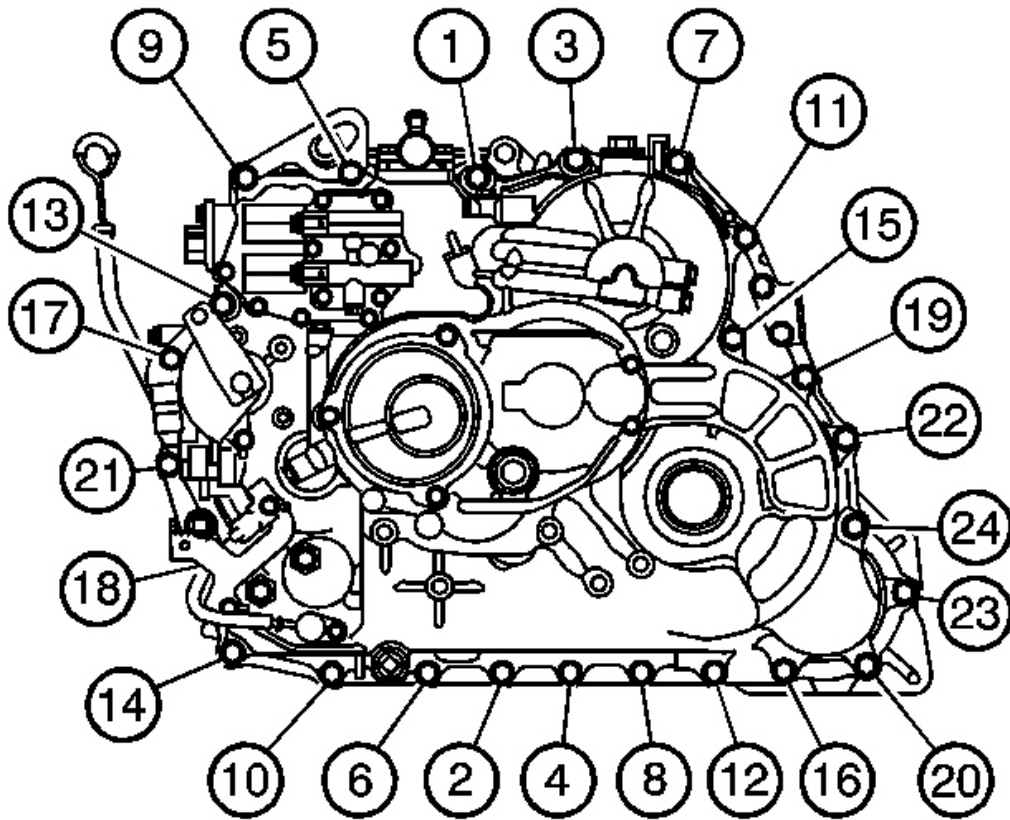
Tightening The Transmission Case Assembly In Sequence
